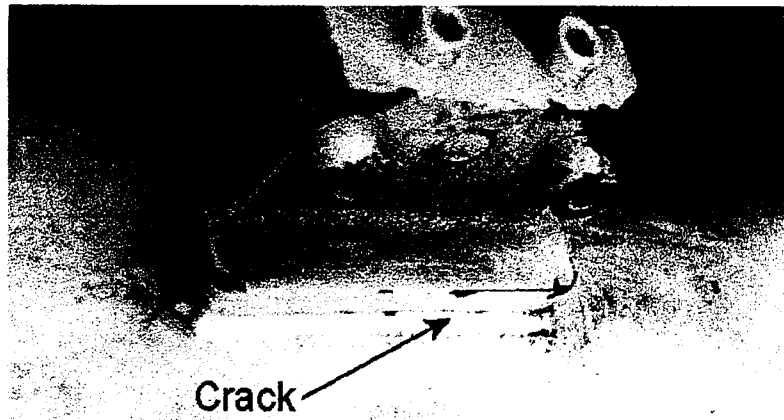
Saddle blocks on Pump 1. Saddle blocks used to attach wearing ring at lower bearing location. Note crack along perimeter of weld.
